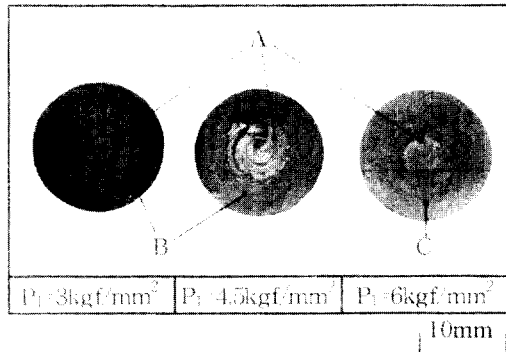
Fracture surface of Cu-W side after tensile test
